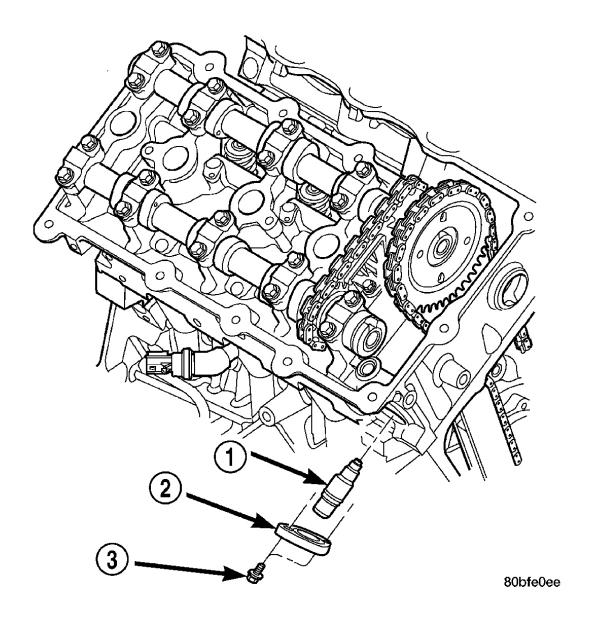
View Of Primary Timing Chain Tensioner Courtesy of CHRYSLER LLC
